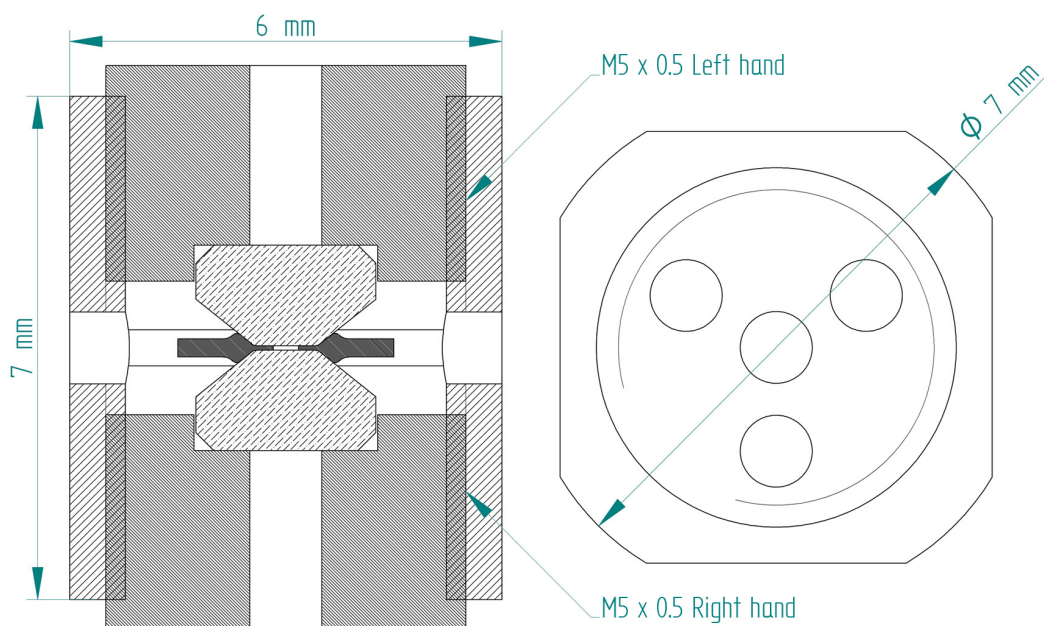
Drawings of the TM-DAC with key dimensions.
